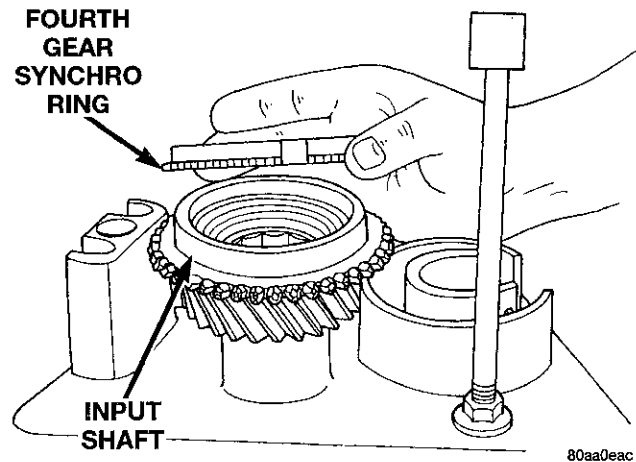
Installing Fourth Gear Synchro Ring On Input Shaft
